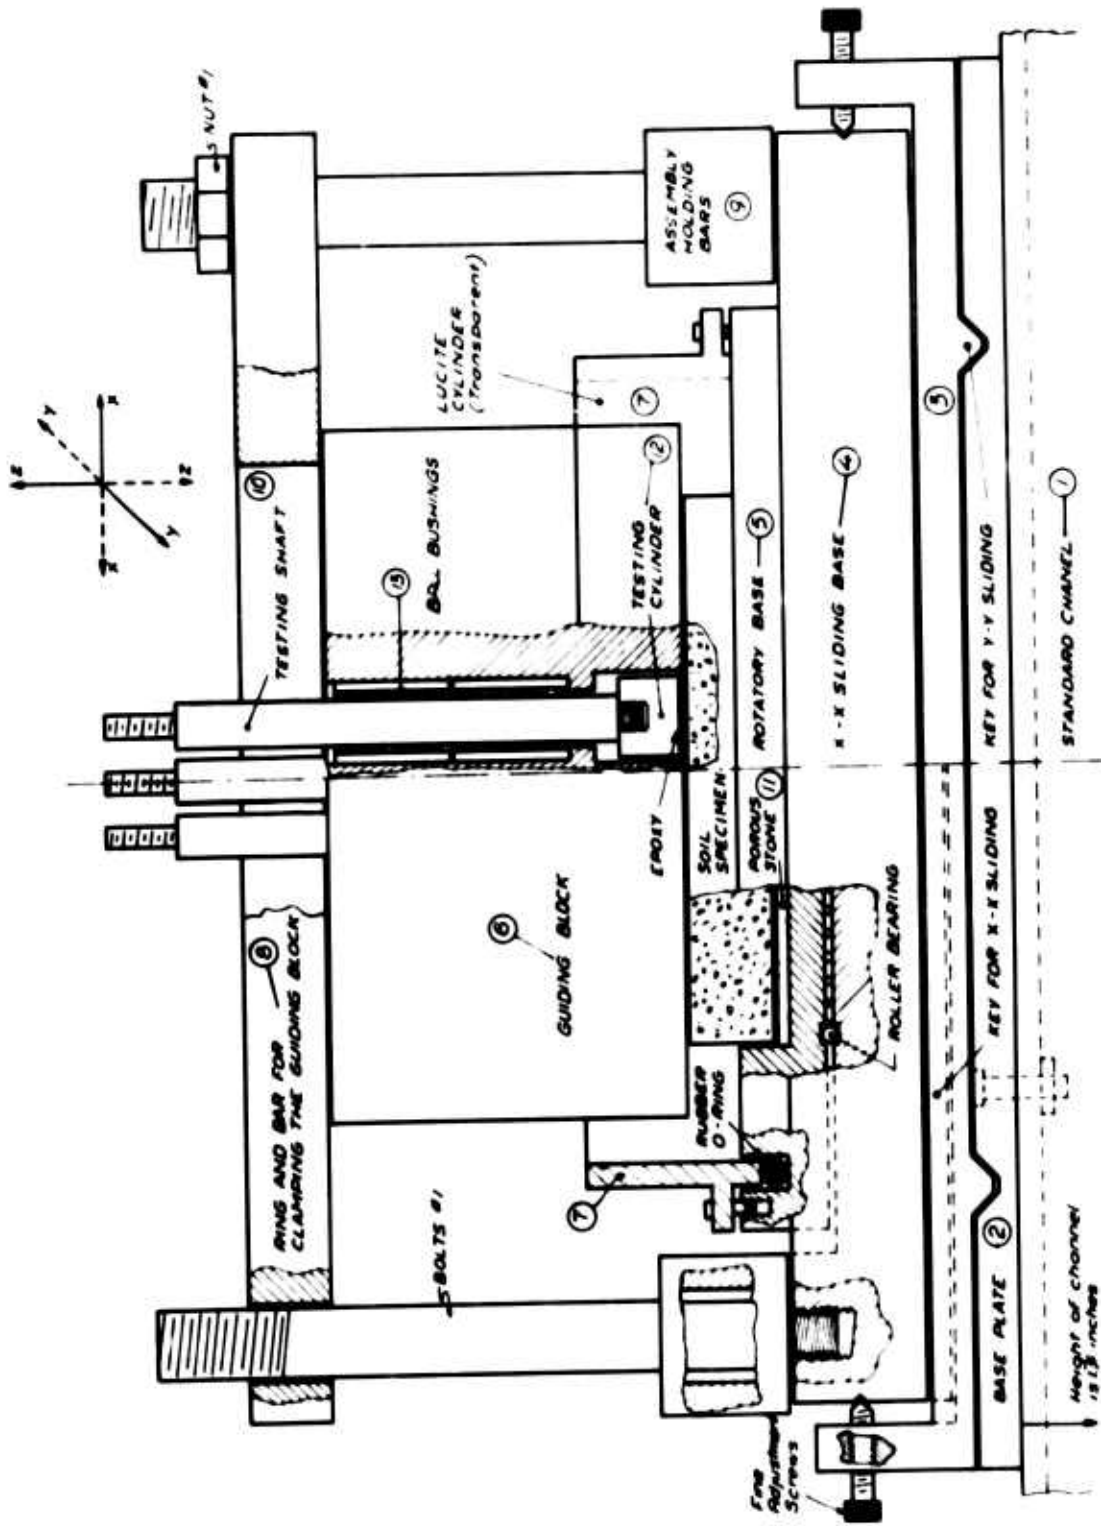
SPECIMEN SUPPORTS, GUIDING BLOCK, AND ACCESSORIES (CROSS SECTION)
